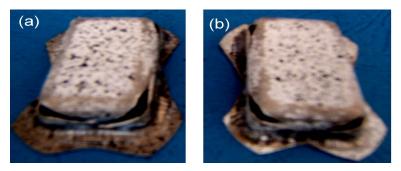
Drawn rectangular cups $(T = 180^{\circ}C, V = 90 \text{ mm/min})$: (a) Formed by conventional WDD (b) Formed by DD with local heating and cooling technique.
